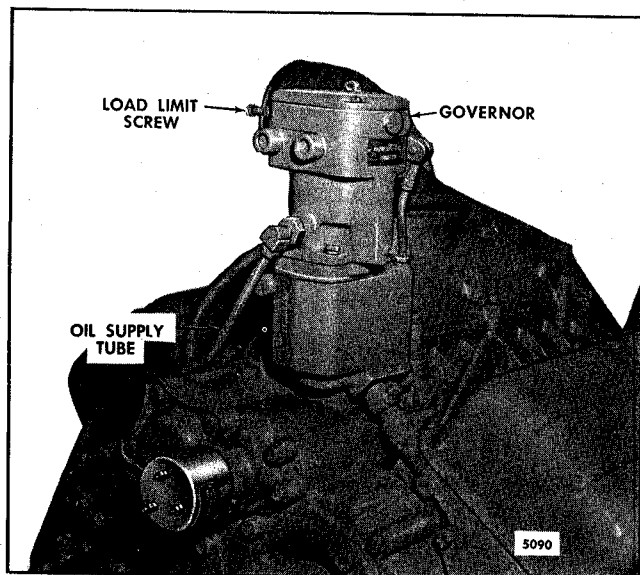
Hydraulic Governor Mounting (6V Engine)
